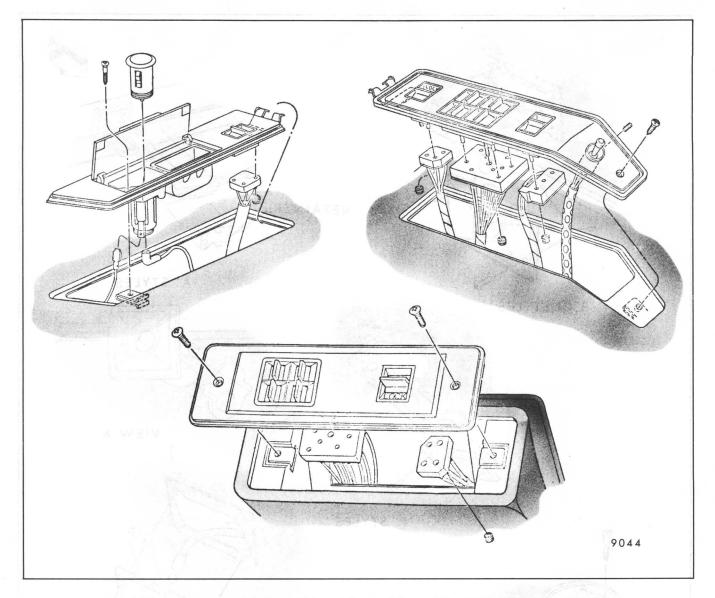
Door Armrest Switch Cover Plate and Remote Mirror Cable Attachment - "C and E" Styles
